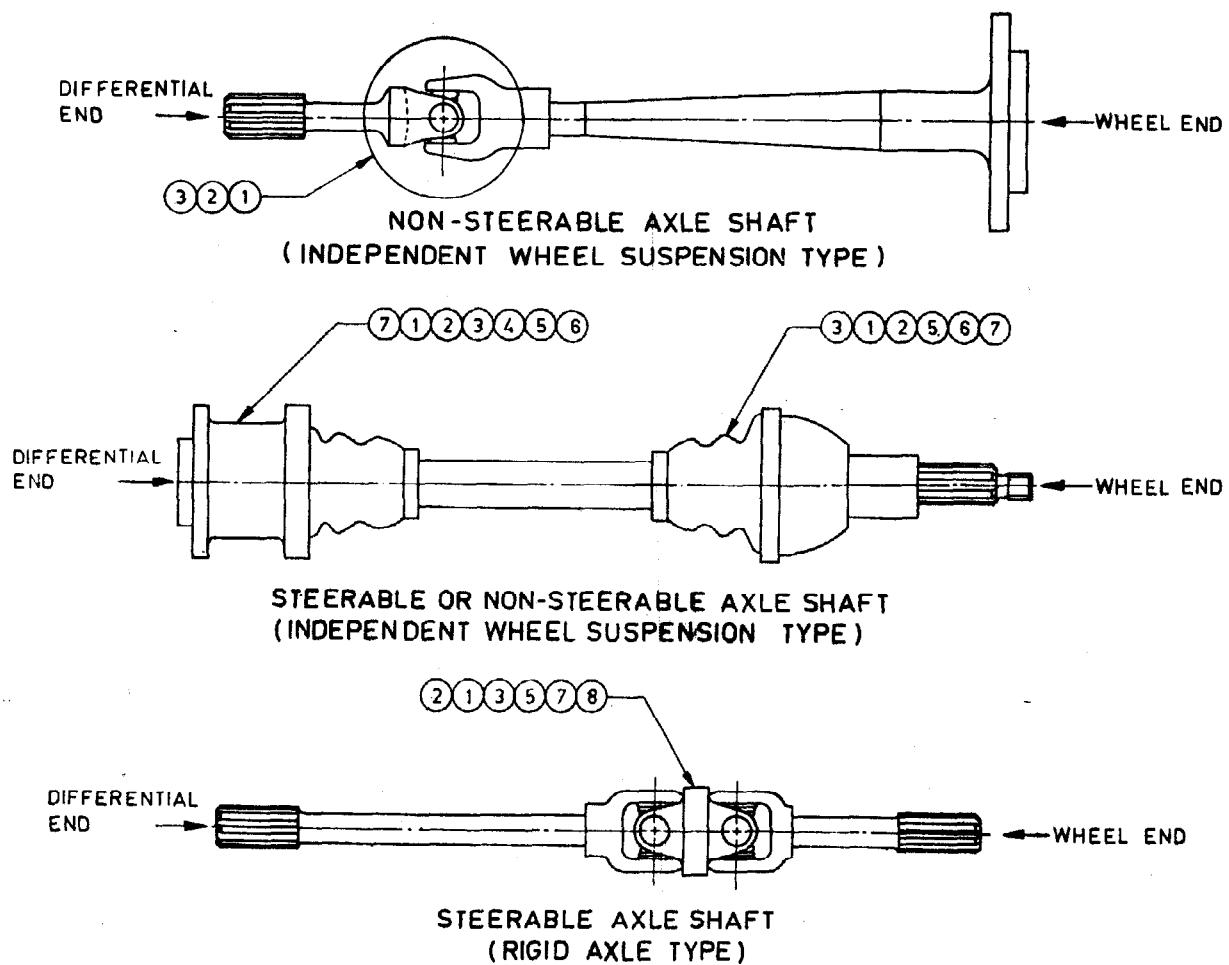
TYPICAL MULTIJoint DRIVESHAFT ARRANGEMENTS
